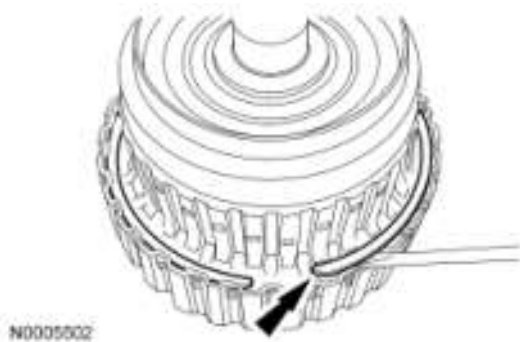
Locating Direct Clutch Outer Shell Retaining Ring
